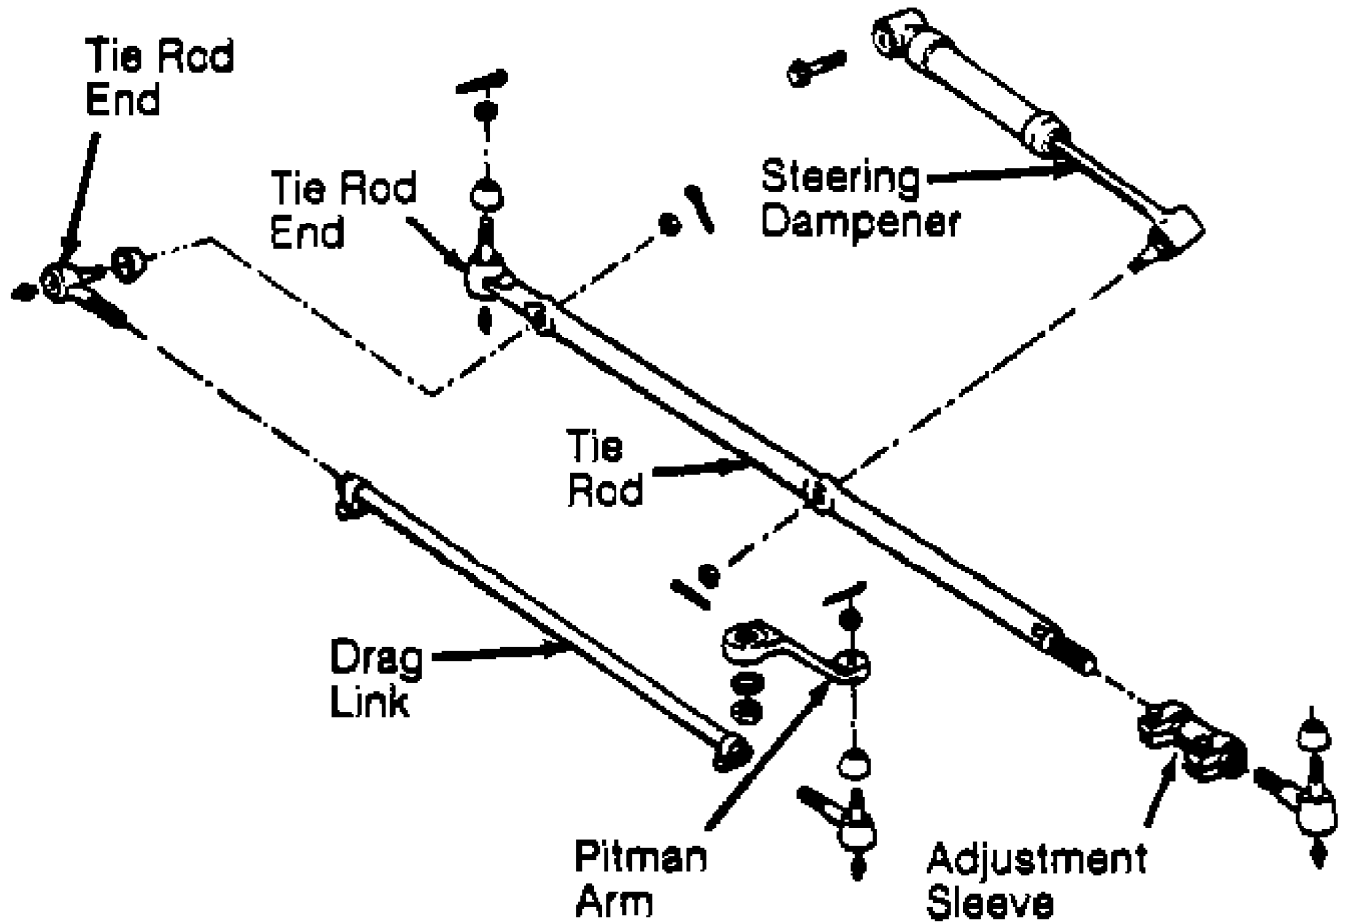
Exploded View Of Steering Linkage (Wrangler)
